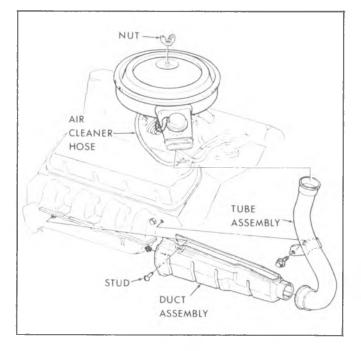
A·12V--Carburetor Heat Stove Assembly—Mark
